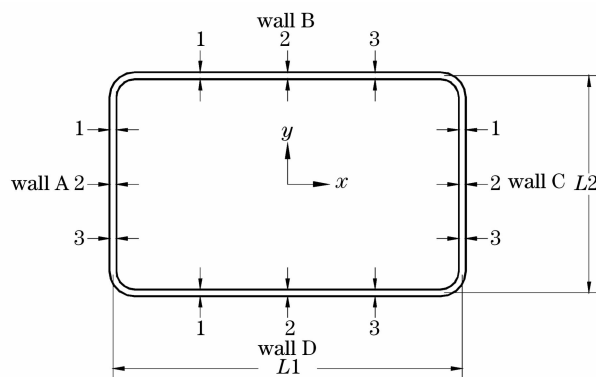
Details of dimensions taken for measurement on a laser consolidated rectangular cutting pattern
